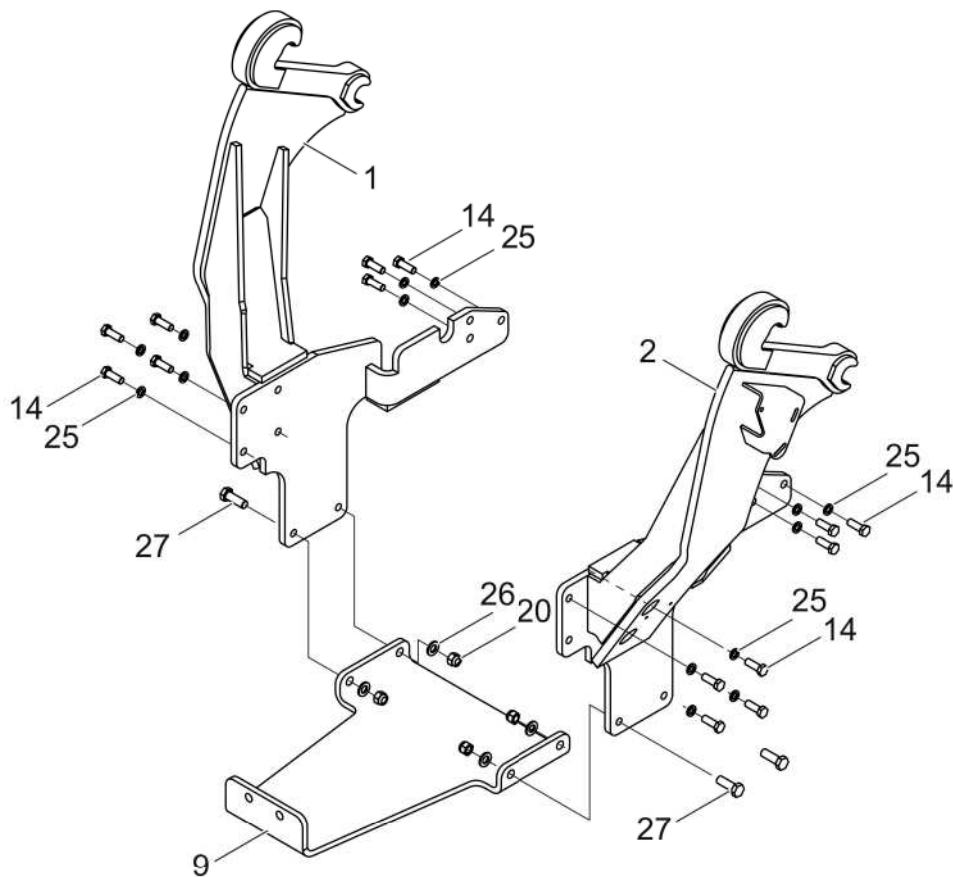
A Mounting support frame on KIOTI dk551C tractors with KB2375 backhoe
